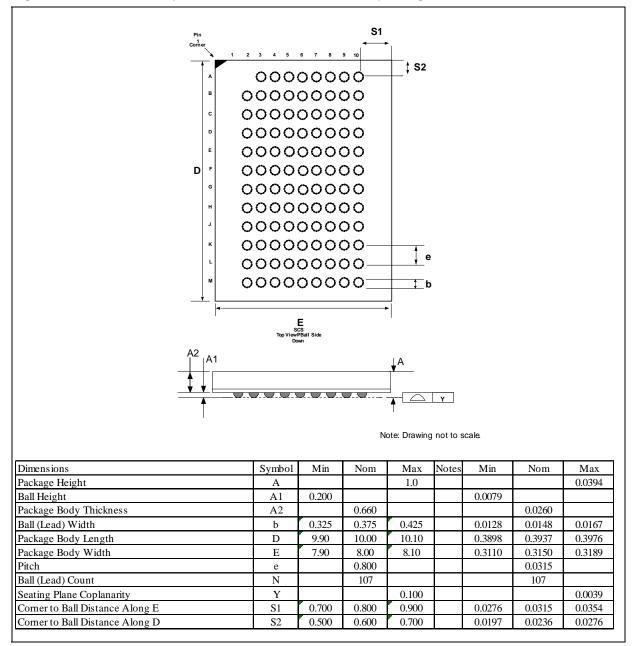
Mechanical Specifications: x16C (107-ball) package (8x10x1.0 mm)
